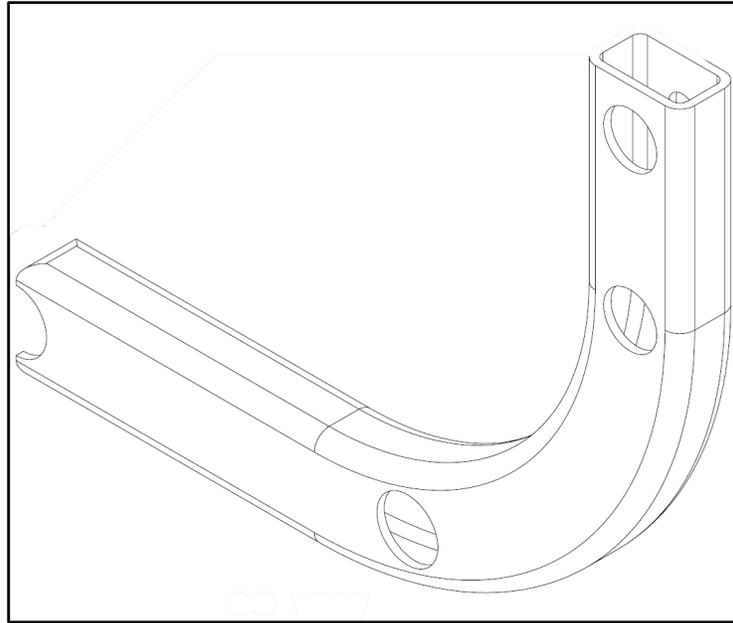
Steel Bracket Arm Engineering CAD Drawing
